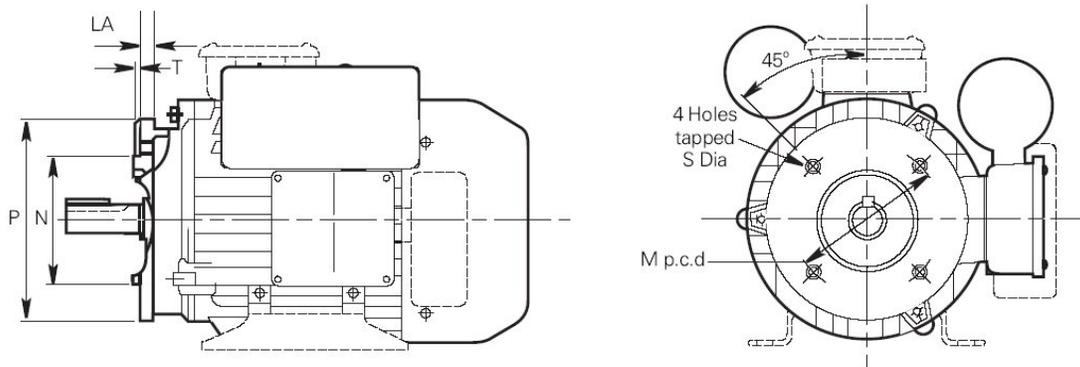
A face mounted motor B14 (B3/B14 or B34)
